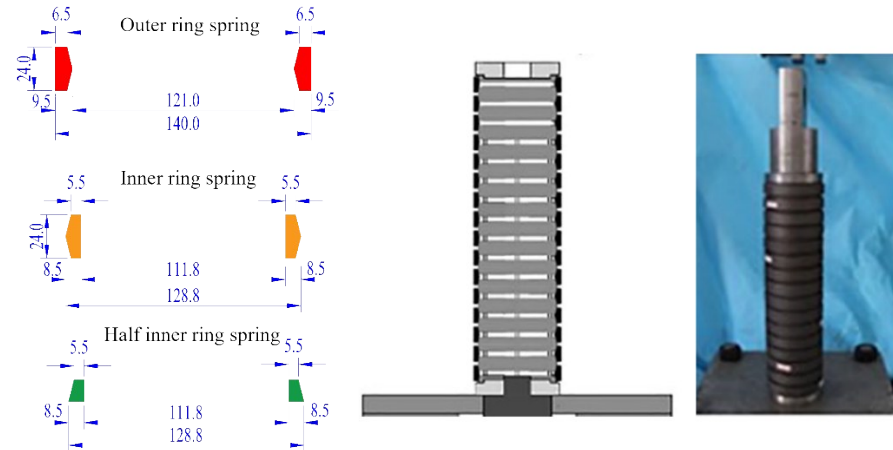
SMA ring spring specimen and its dimensions (units: mm)
